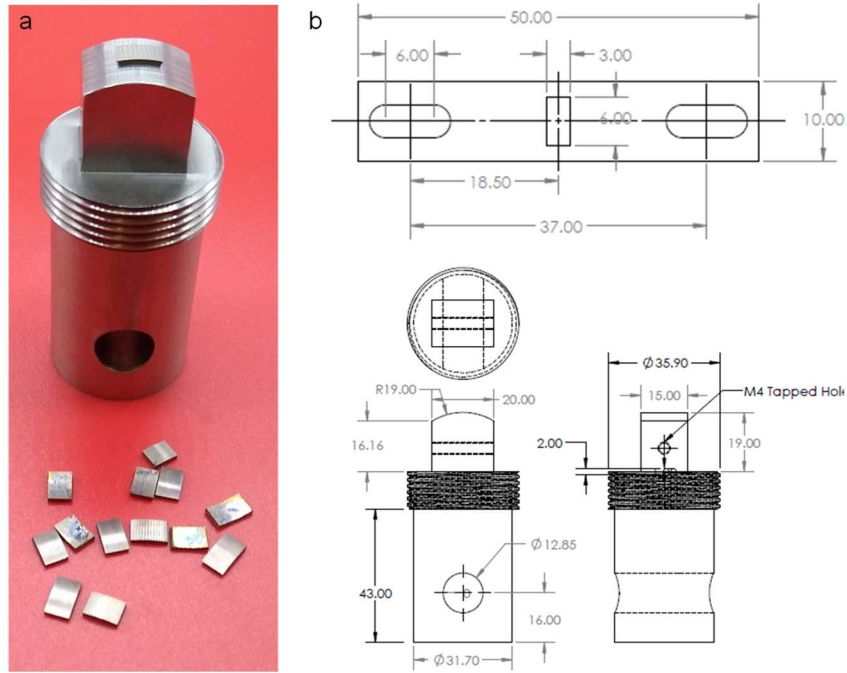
(a) The Instron test fixture and Zr-based MG samples (5 mm 5 mm 1 mm) cut from the tube for imprinting tests. (b) The drawing of the fixture and the holding strap.
